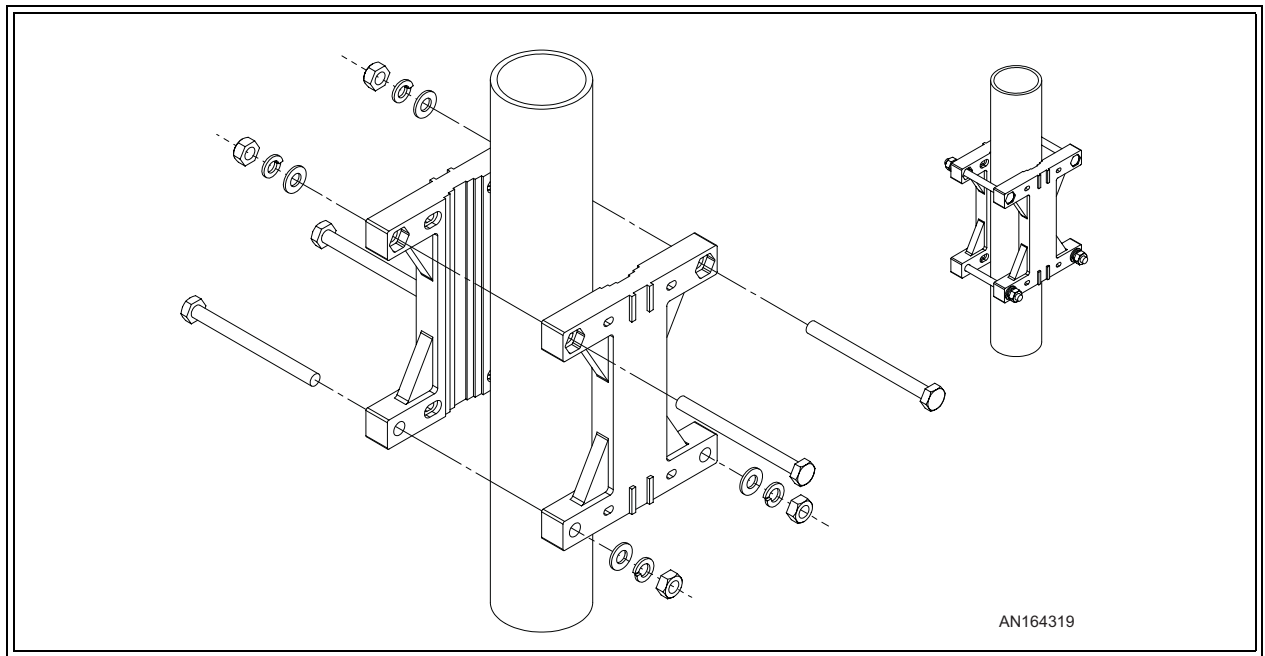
Adjustable Elevation Dual Aeras WaveLink Pole Mount Bracket Assembly
